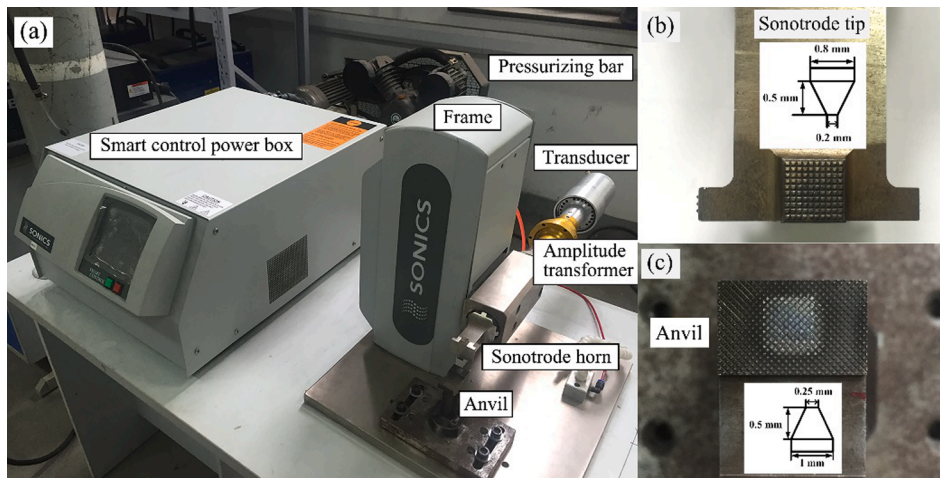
Experimental setup: (a) Ultrasonic metal spot welding setup, (b) and (c) pattern and dimensions of the sonotrode tip and anvil.
